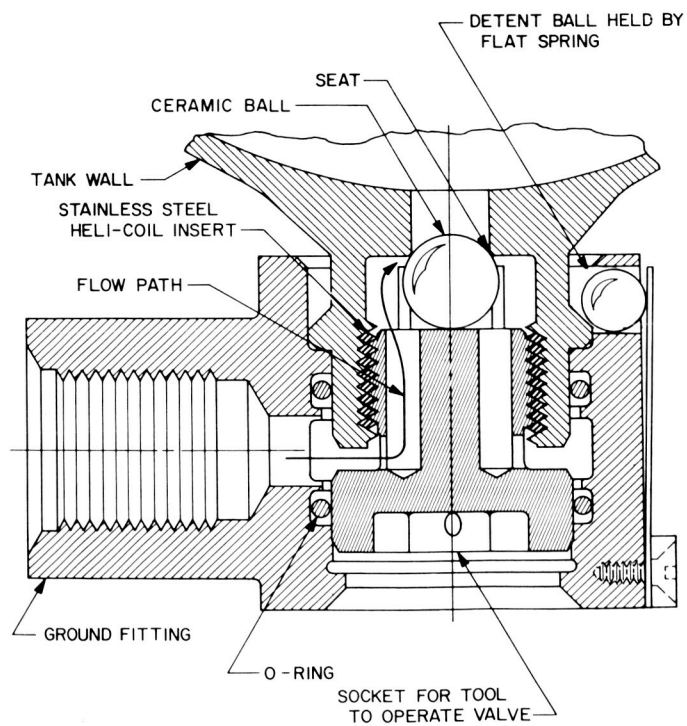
Ball fill-valve cross section (type with flow passage in screw)
